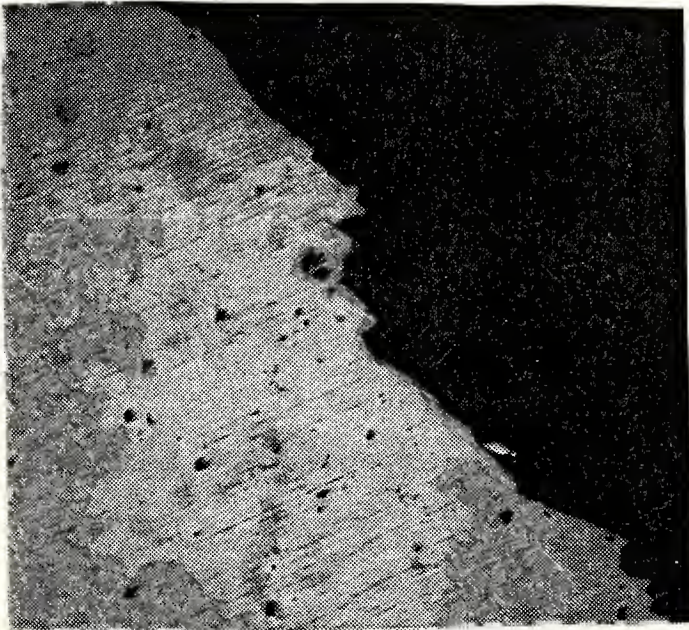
Observation of transverse section of the fracture surface of a l4 weld repaired sample. (100X). Note the porosity at or near the fracture surface. This observation along with that in Figure 12 indicate that the fatigue fracture in all welded samples was probably initiated at porosity located in the weld filler material.
